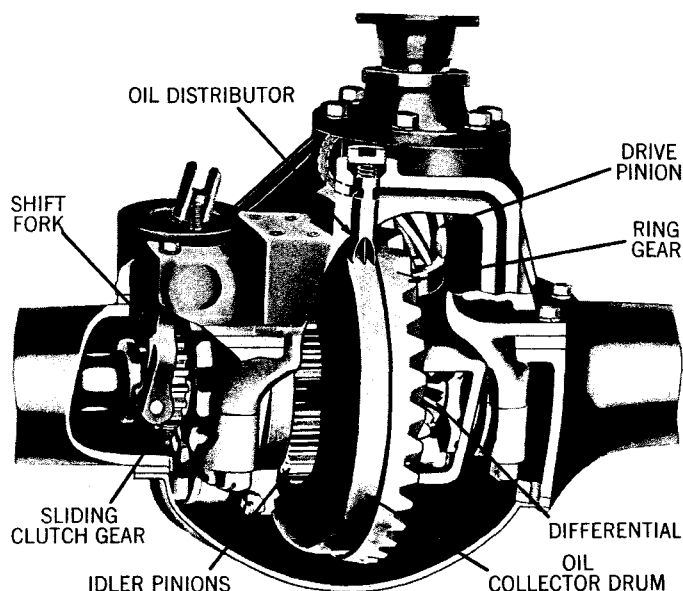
Cutaway View of 2-Speed Axle Assembly
